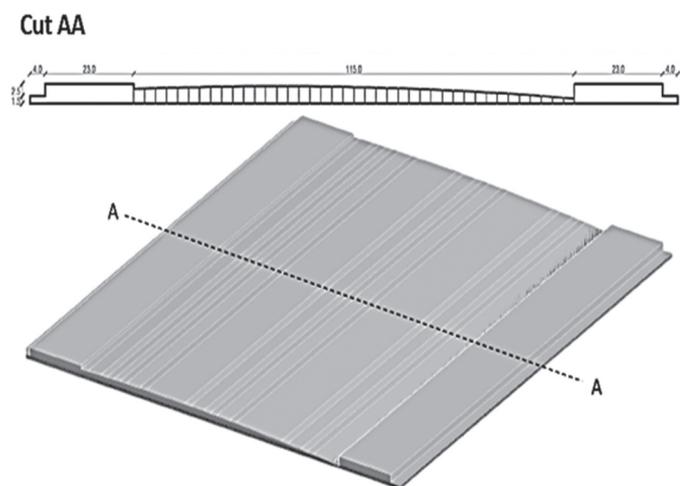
Technical drawing of aluminium filter 1. Top image refers to the cross-sectional view of the piece represents three-dimensional in the image below
